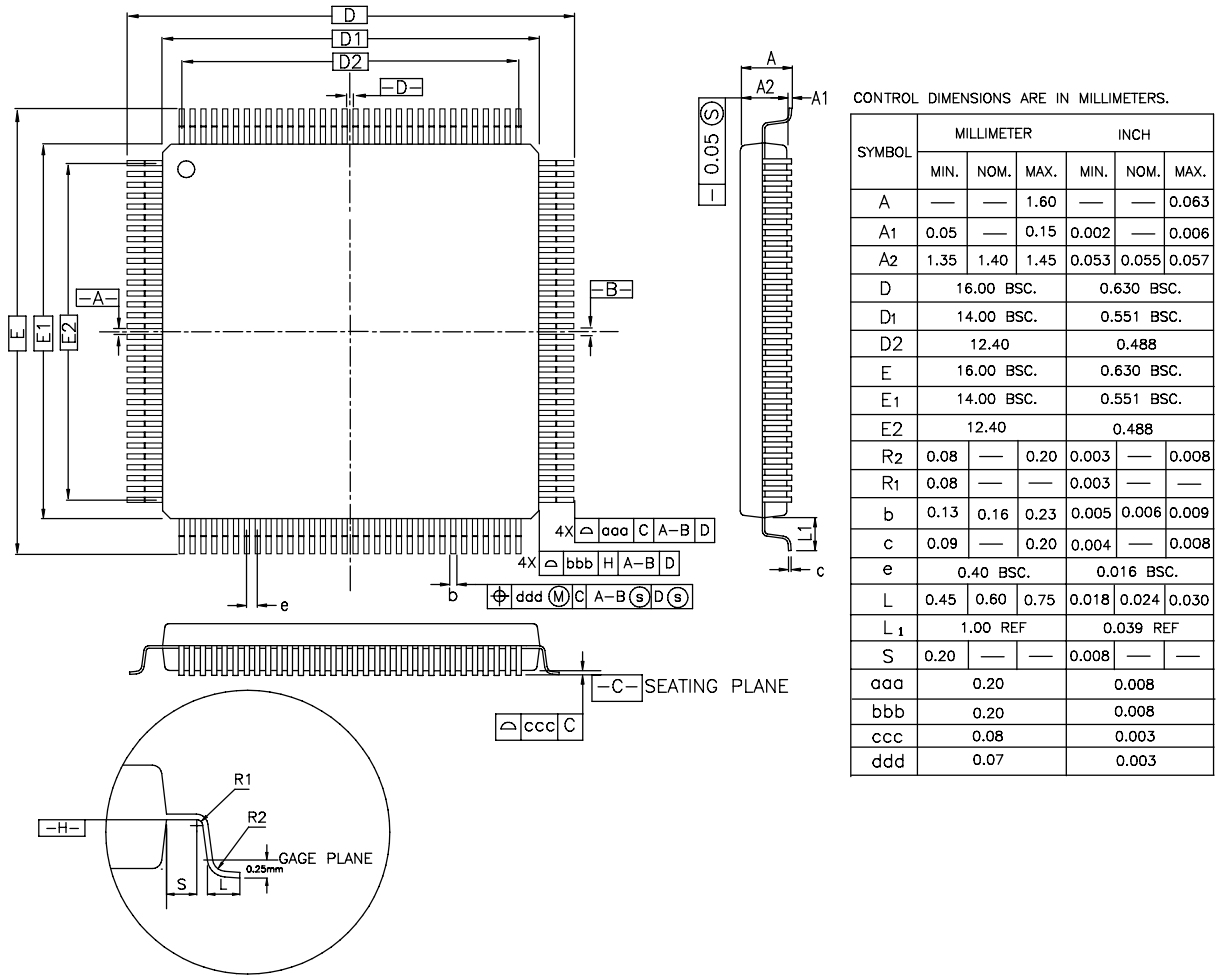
D2-814xx Package Dimensions, 128-Pin Package
